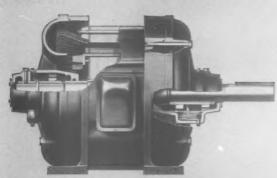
Sectional view of small open type squirrel cage induction motor.
